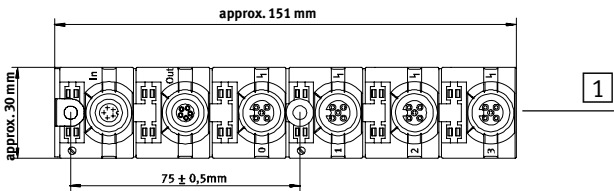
/2: Fitting dimensions CP-A04-M12-CL
